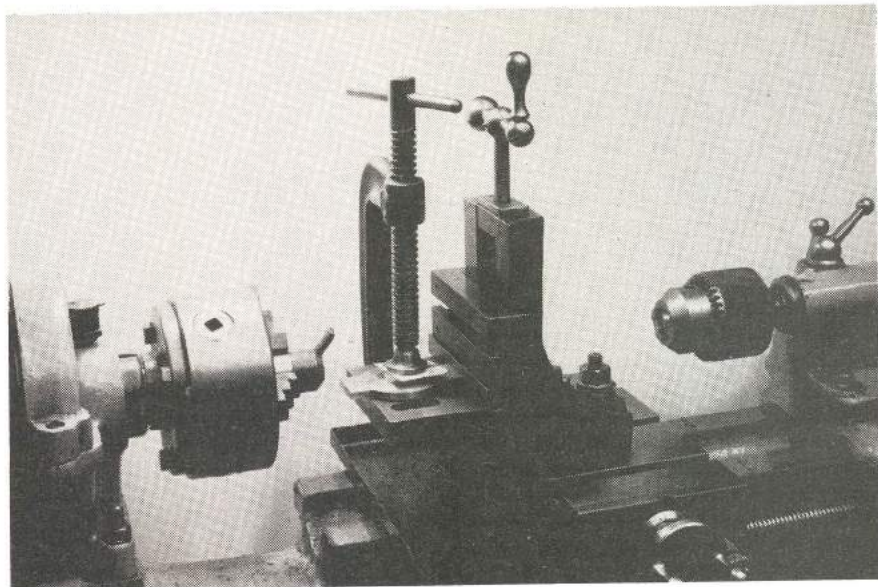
Machining the end face of the cover using the vertical slide on the lathe and a fly-cutter.
